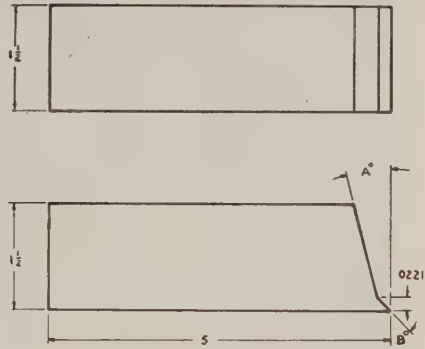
WORK BLOCKS USED WHILE DETERMINING TYPE OF TOOTH CONTACT
